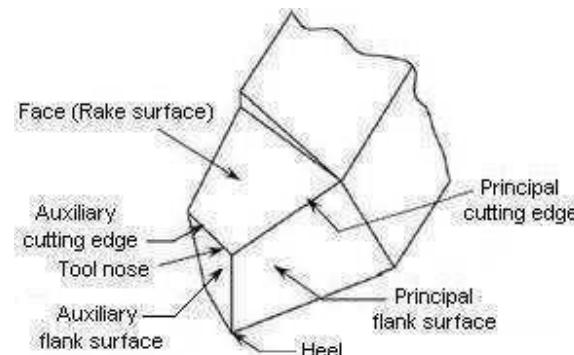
(a) Basic features of single point cutting (turning) tool
